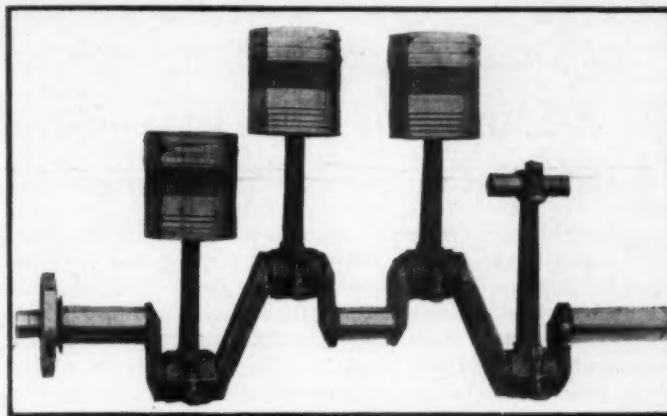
The crankshaft with the connecting rods and pistons in place, showing a flanging for the flywheel and other refinements
